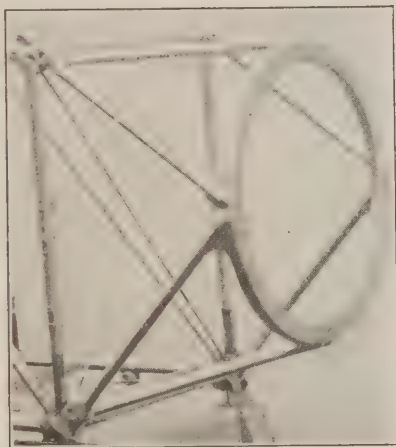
Engine mount for radial engine. (Courtesy Bureau of Aeronautics, U. S. Navy, and Chance Vought Corp.)
